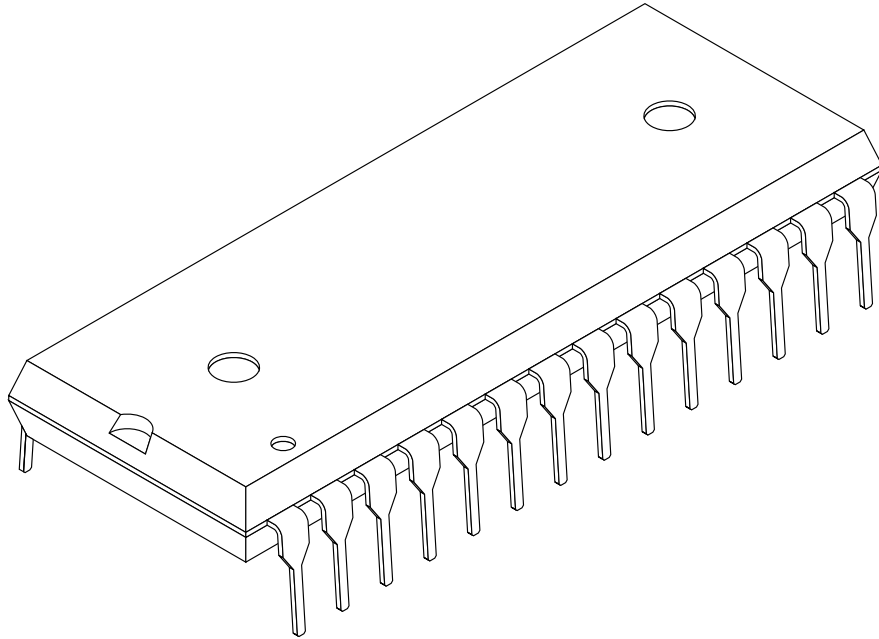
28-Pin 600 mil PDIP Package Dimensions
